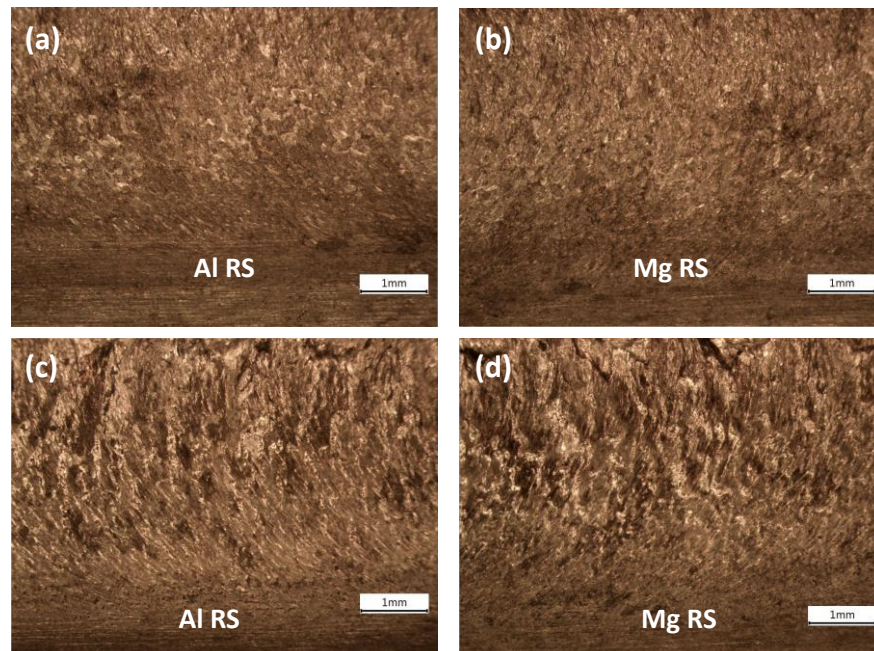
Adhesive-FSW joint failed on ZEK100 Mg after fatigue.
